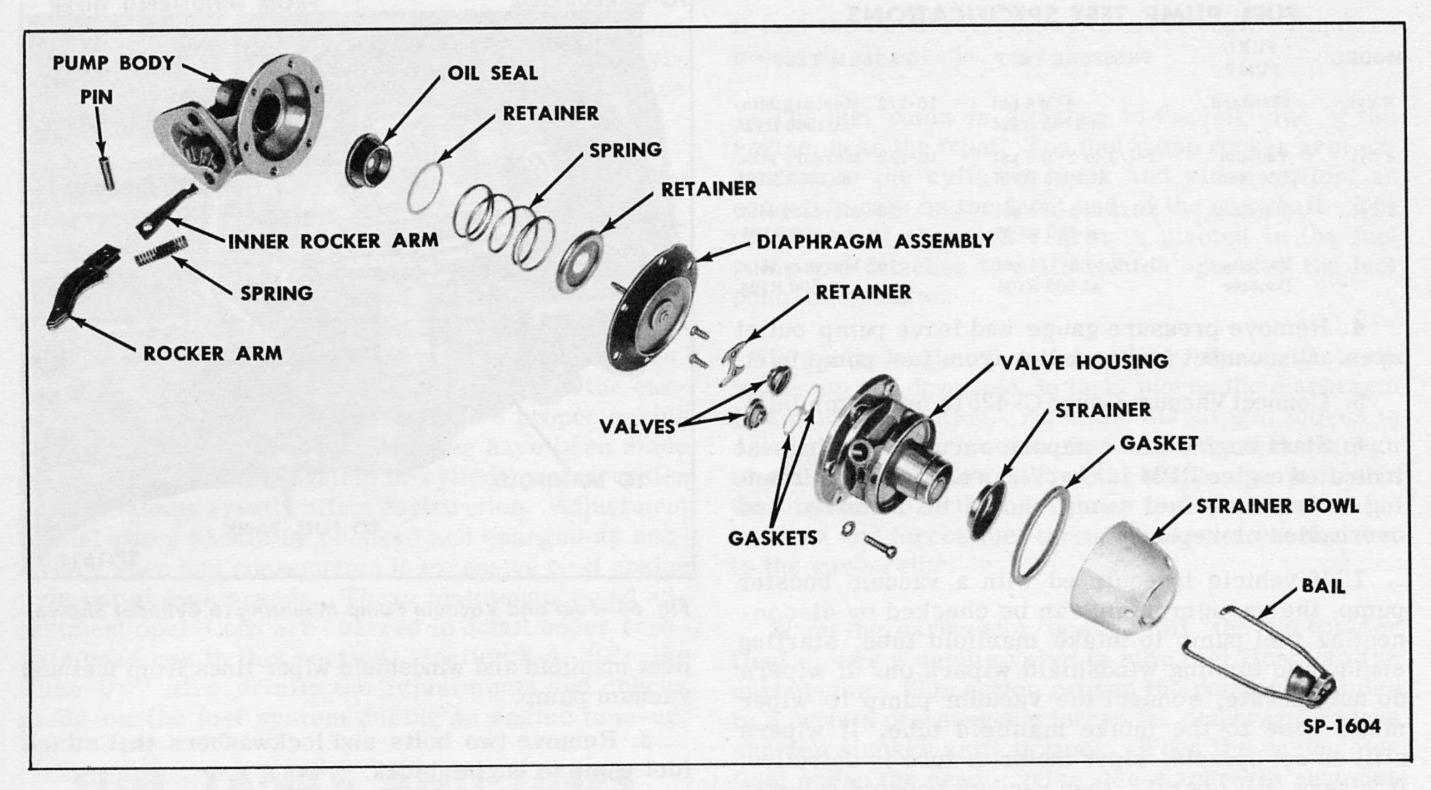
Single Diaphragm Fuel Pump-4 Cylinder-Exploded View
